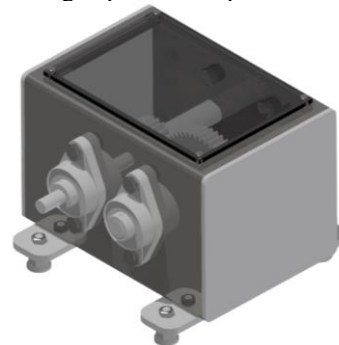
3D model of the dedicated gearbox module with a gear ratio of 1.42 – side view
